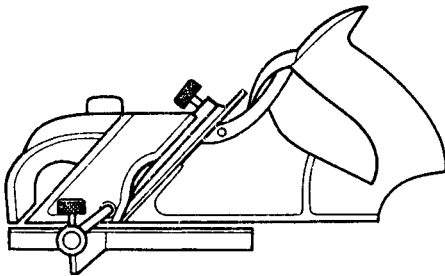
The side filletter or rebate plane used for making rebates.
